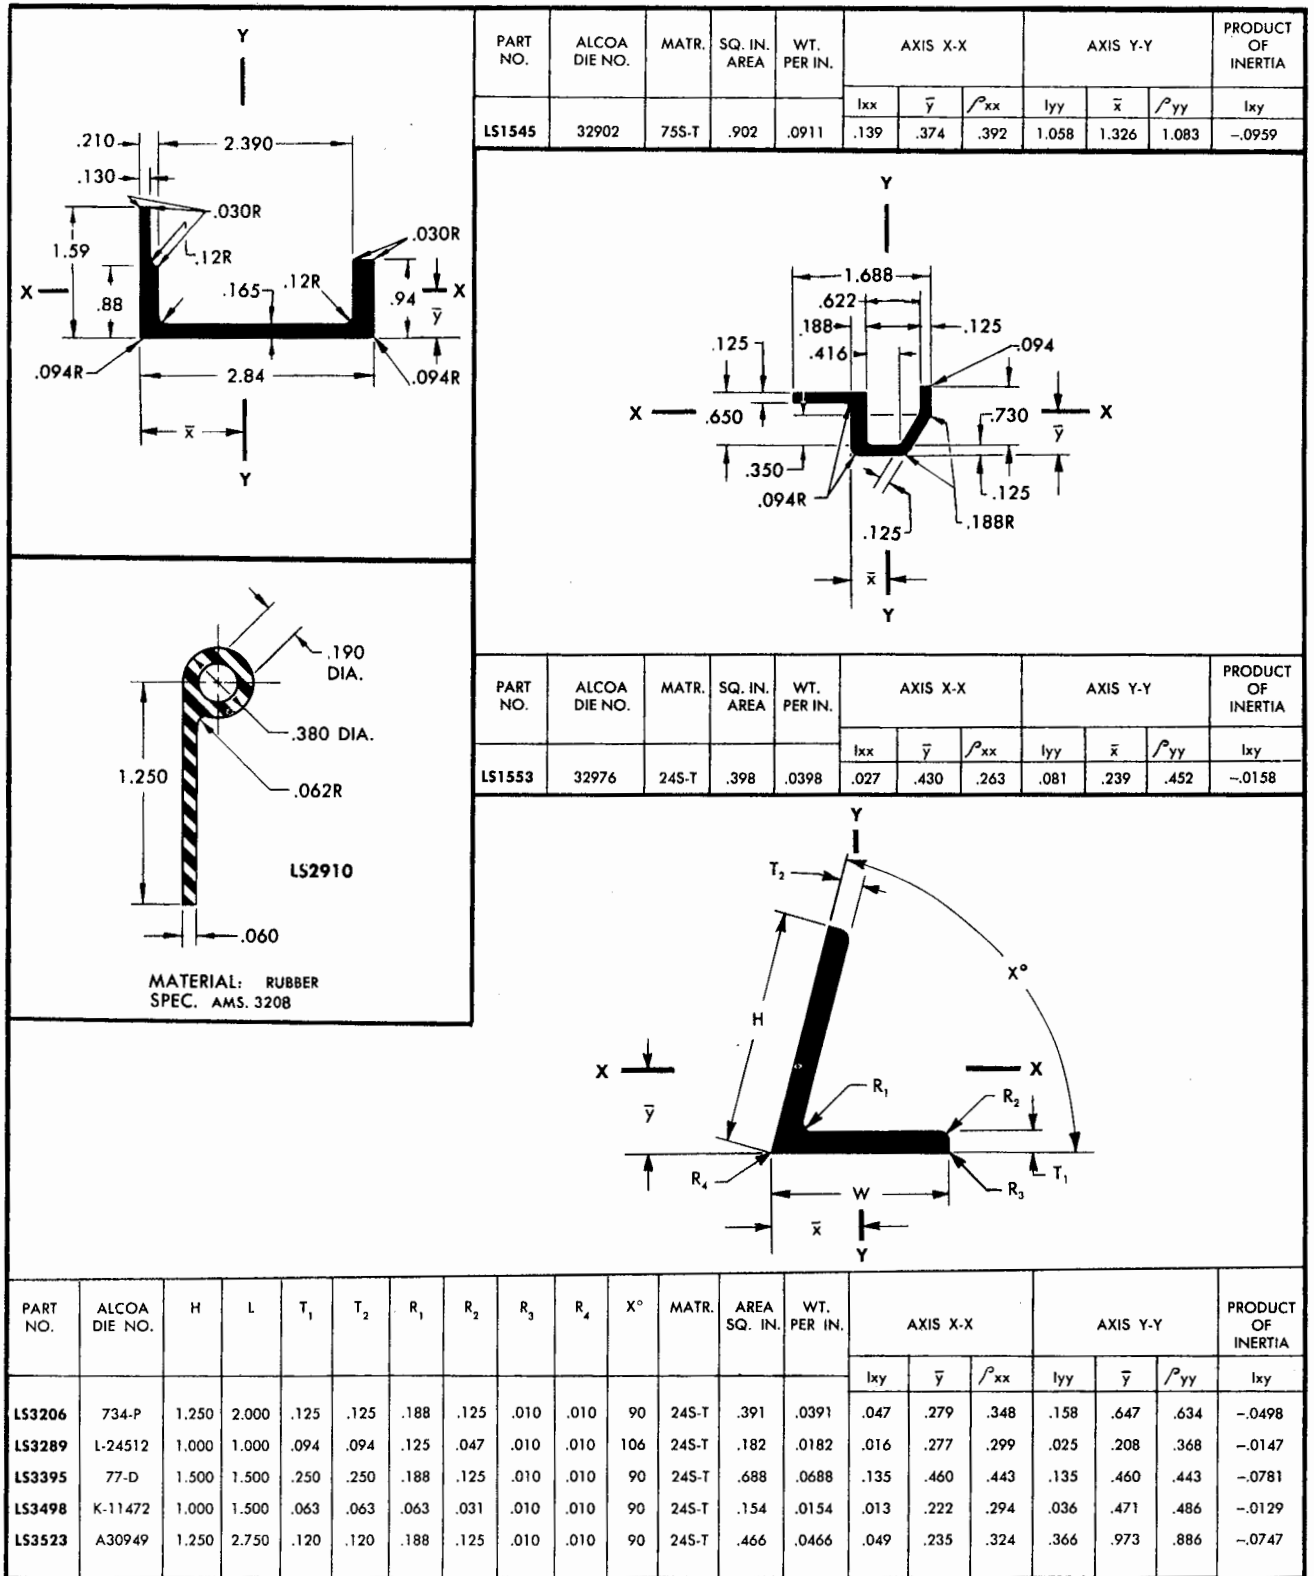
(Sheet 16 of 17 Sheets) — Extruded Standards
